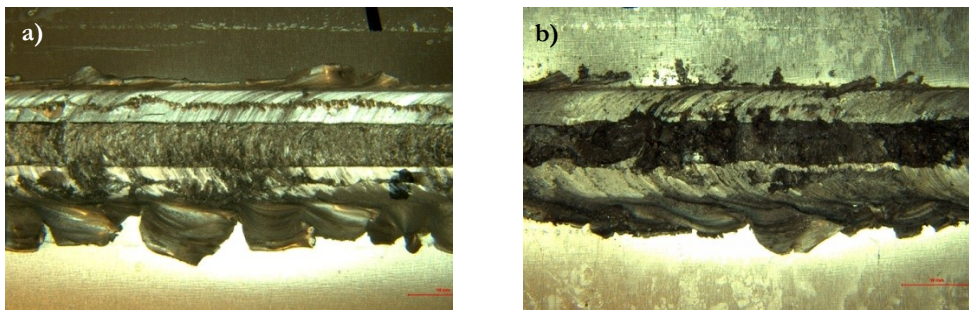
Photographs of aluminum-thermoplastic joint surface appearances. a) AA5754-PP joint welded with 1800 rpm, 10 cm/min b) AA5754-PET joint welded with 2000 rpm, 10 cm/min
